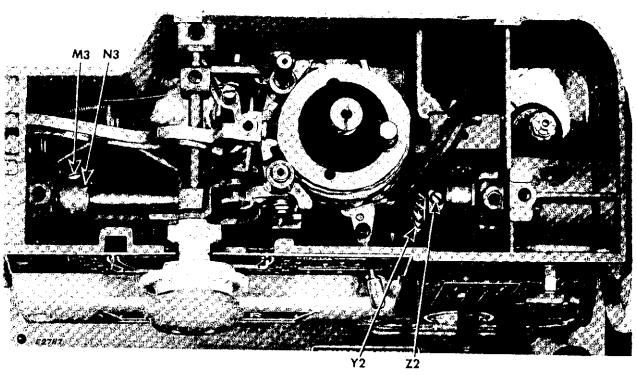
Adjustments for End Play or Binding of Arm Shaft
